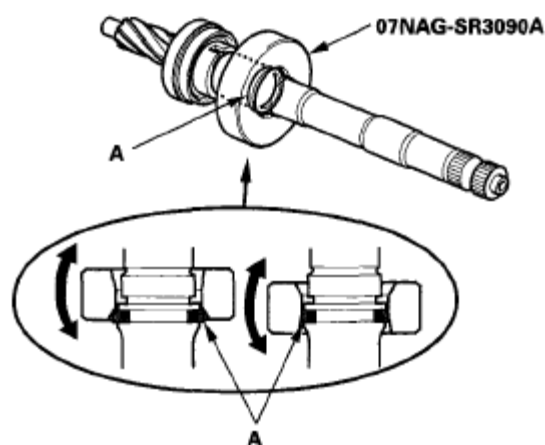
Identifying Area Applying Power Steering Fluid To Surface Of Valve Seal Ring
